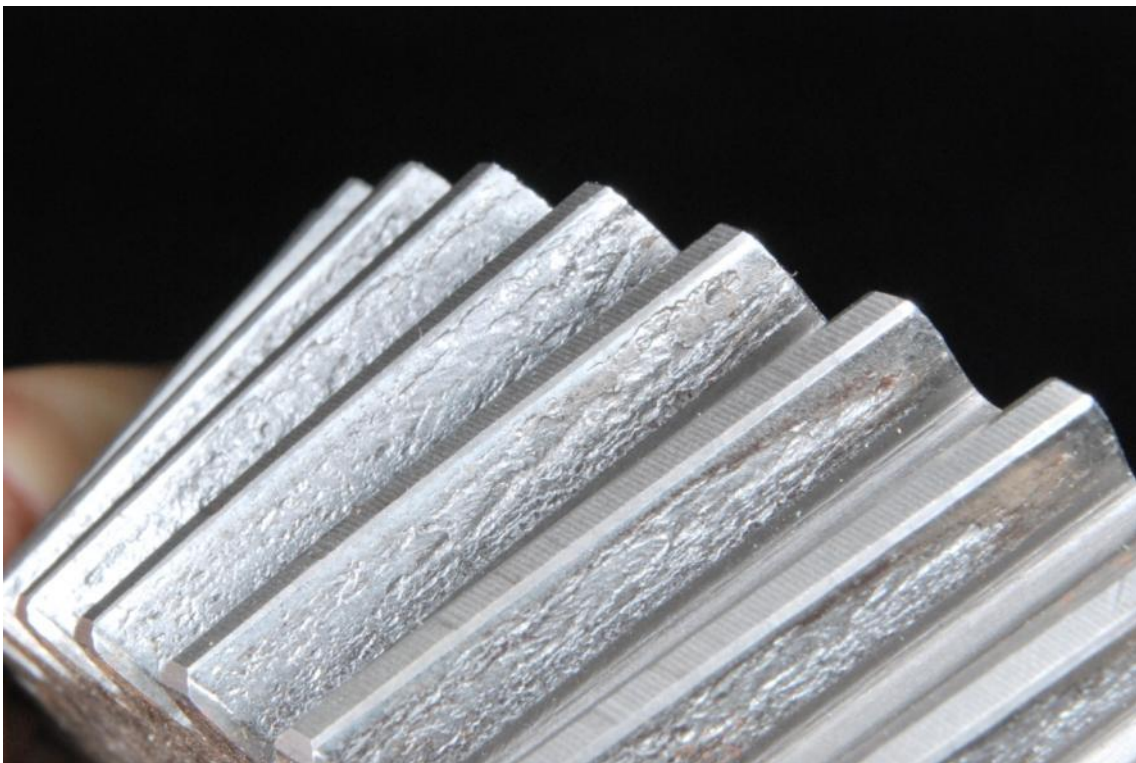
Silver Wing - Severe spalling has occurred over the entire surface of every single tooth on the driving side of the idler timing gear.
